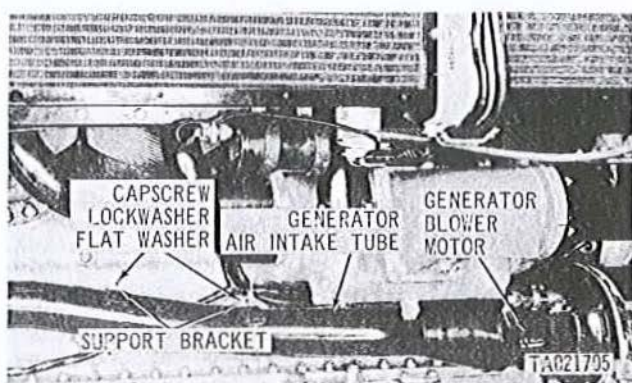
Removing or installing generator air intake tube, model AVDS-1790-2D engine.
